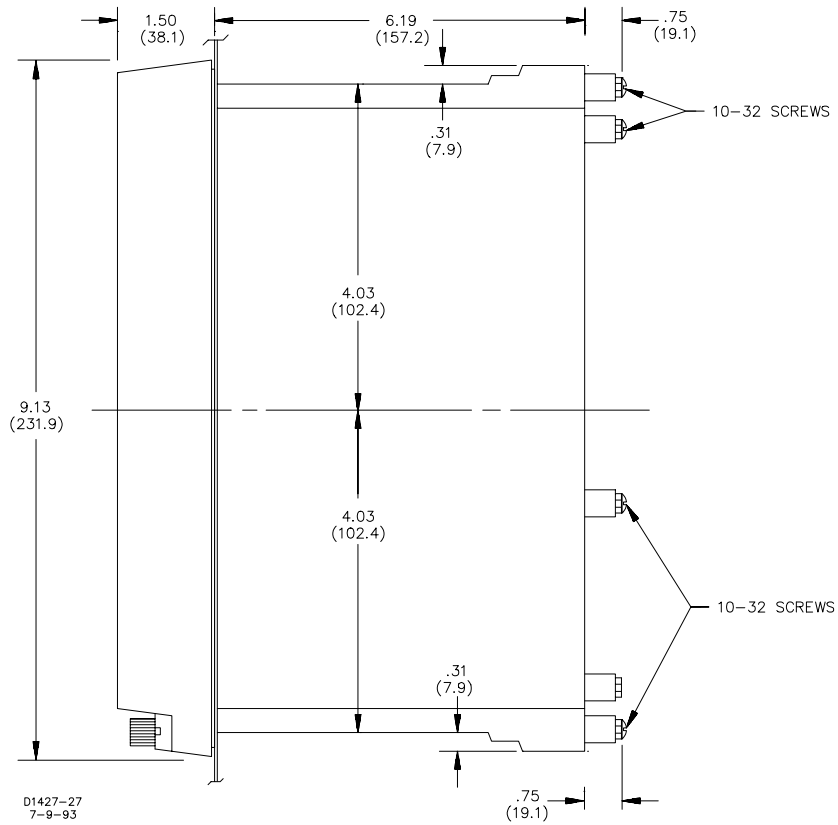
S1 Case, Double-Ended, Semi-Flush Mounting, Outline Dimensions, Side View
